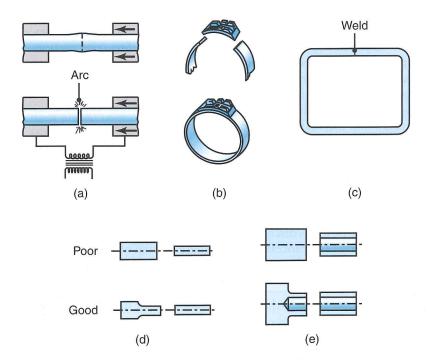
(a) Flash-welding process for end-to-end welding of solid rods or tubular parts. (b) and (c) Typical parts made by flash welding. (d) and (e) Some design guidelines for flash welding.
